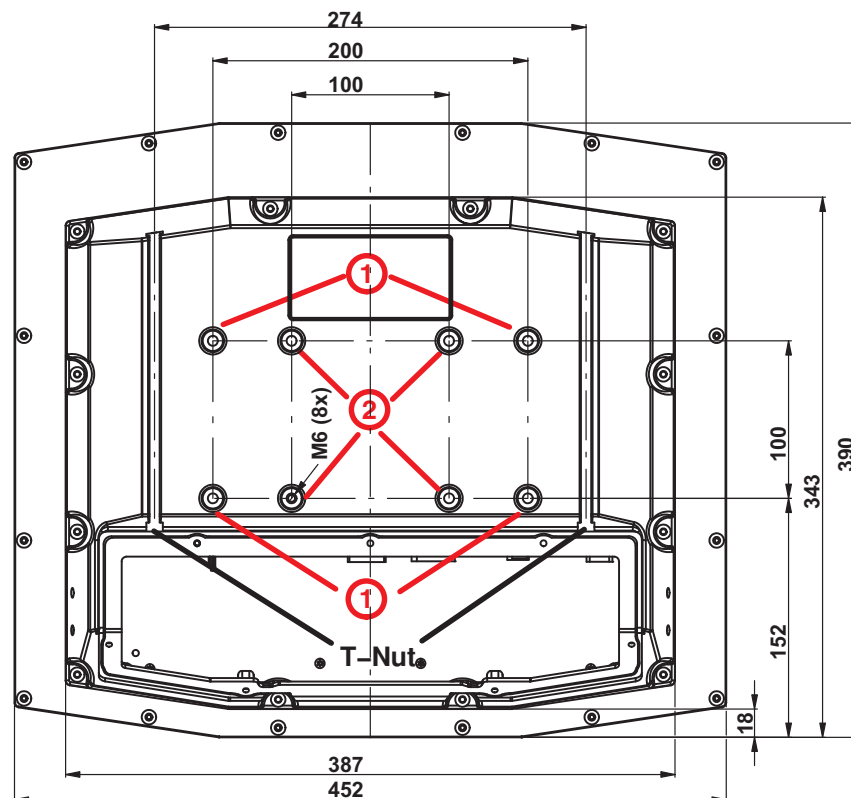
Back, C19 enclosure (all dimensions in mm)
